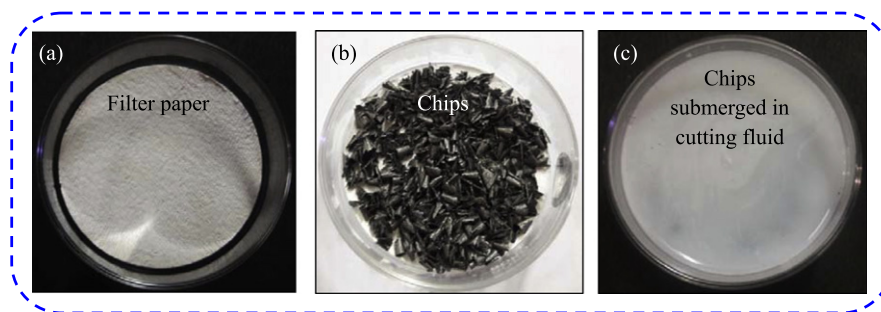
Overview of corrosion test method setup (a) filter paper with petri dish, (b) grey cast iron chips on the filter paper and (c) cutting fluid poured into petri dish.
